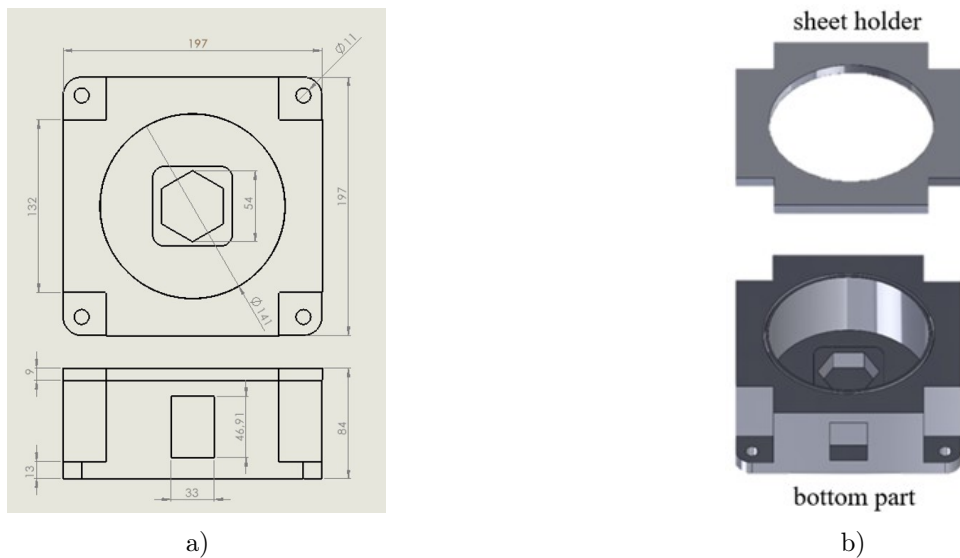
a) Dimensions of the fixture system and b) 3D views of the bottom part and sheet holder sections.
